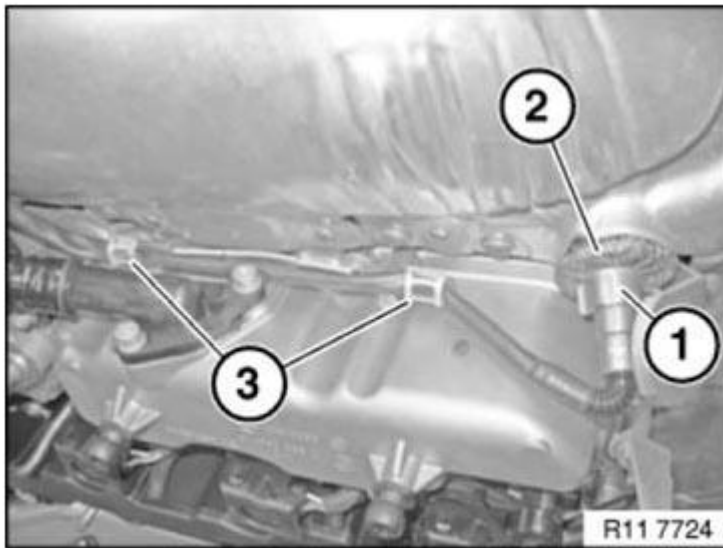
Identifying Heat Shield Wire Ring And Retaining Clips
